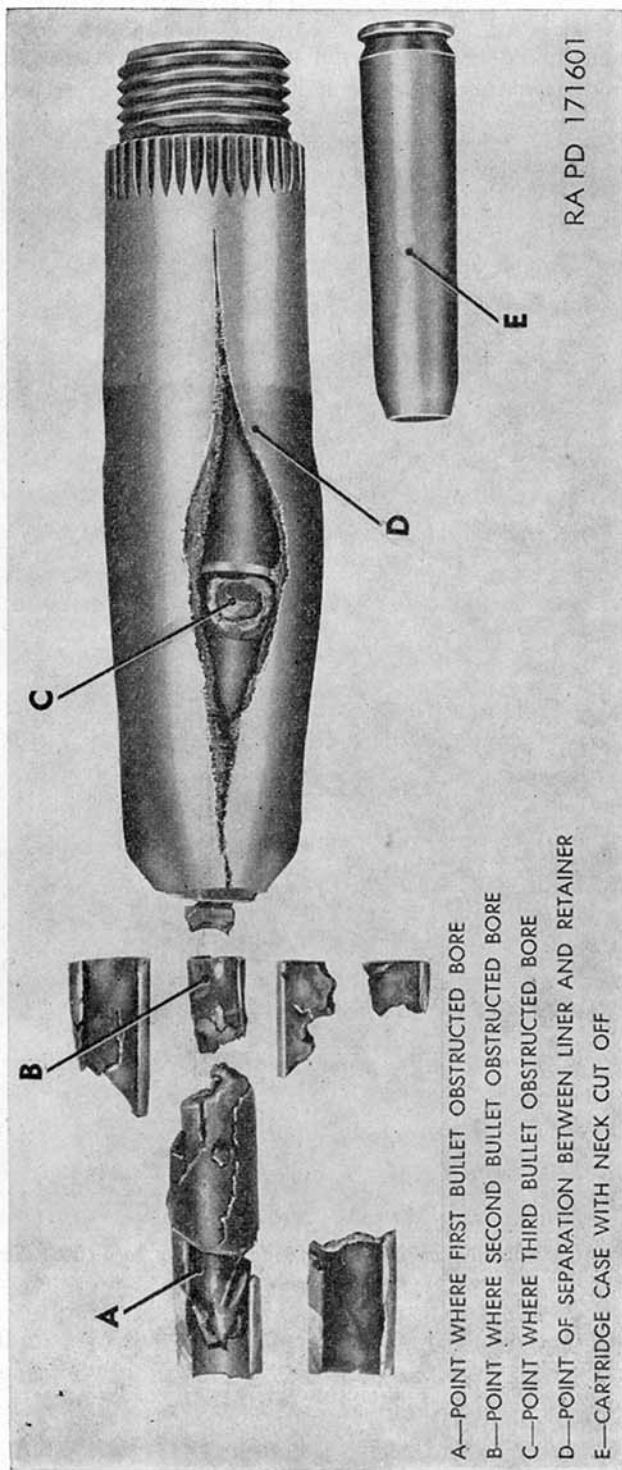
Barrel of cal..50 machine gun M3 damaged by bore obstruction due to excessive heat.
